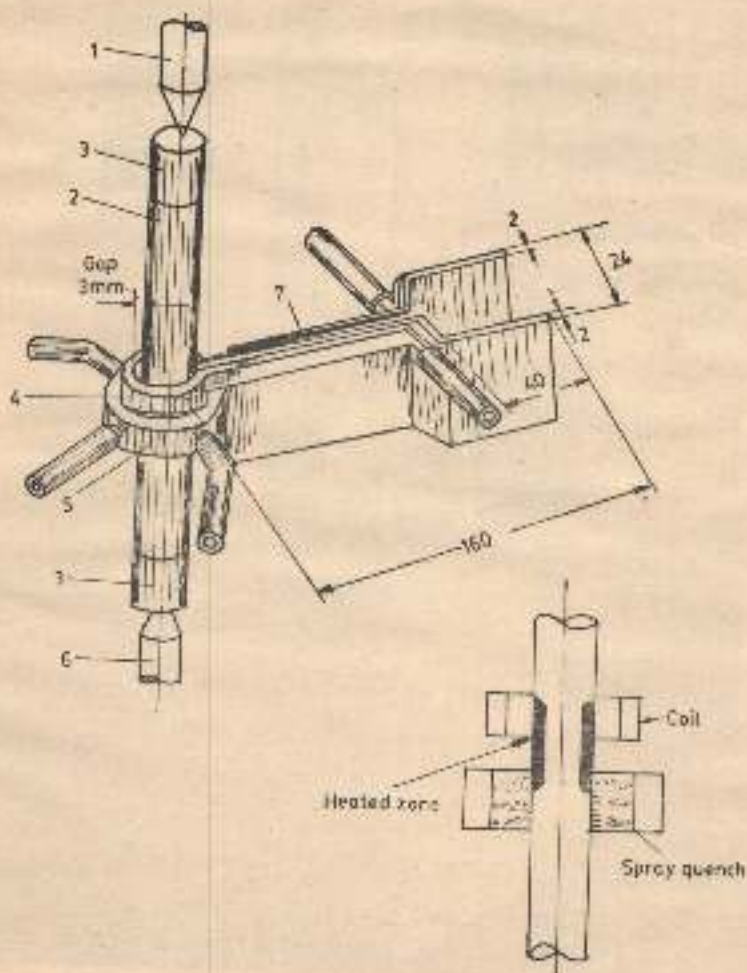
External appearance of a cylindrical inductor with quenching attachment. 6, 1—Rotating centre for hardening machine, 2—Work piece, 3—Extension, 4—Inductor, 5—Quenching attachment
